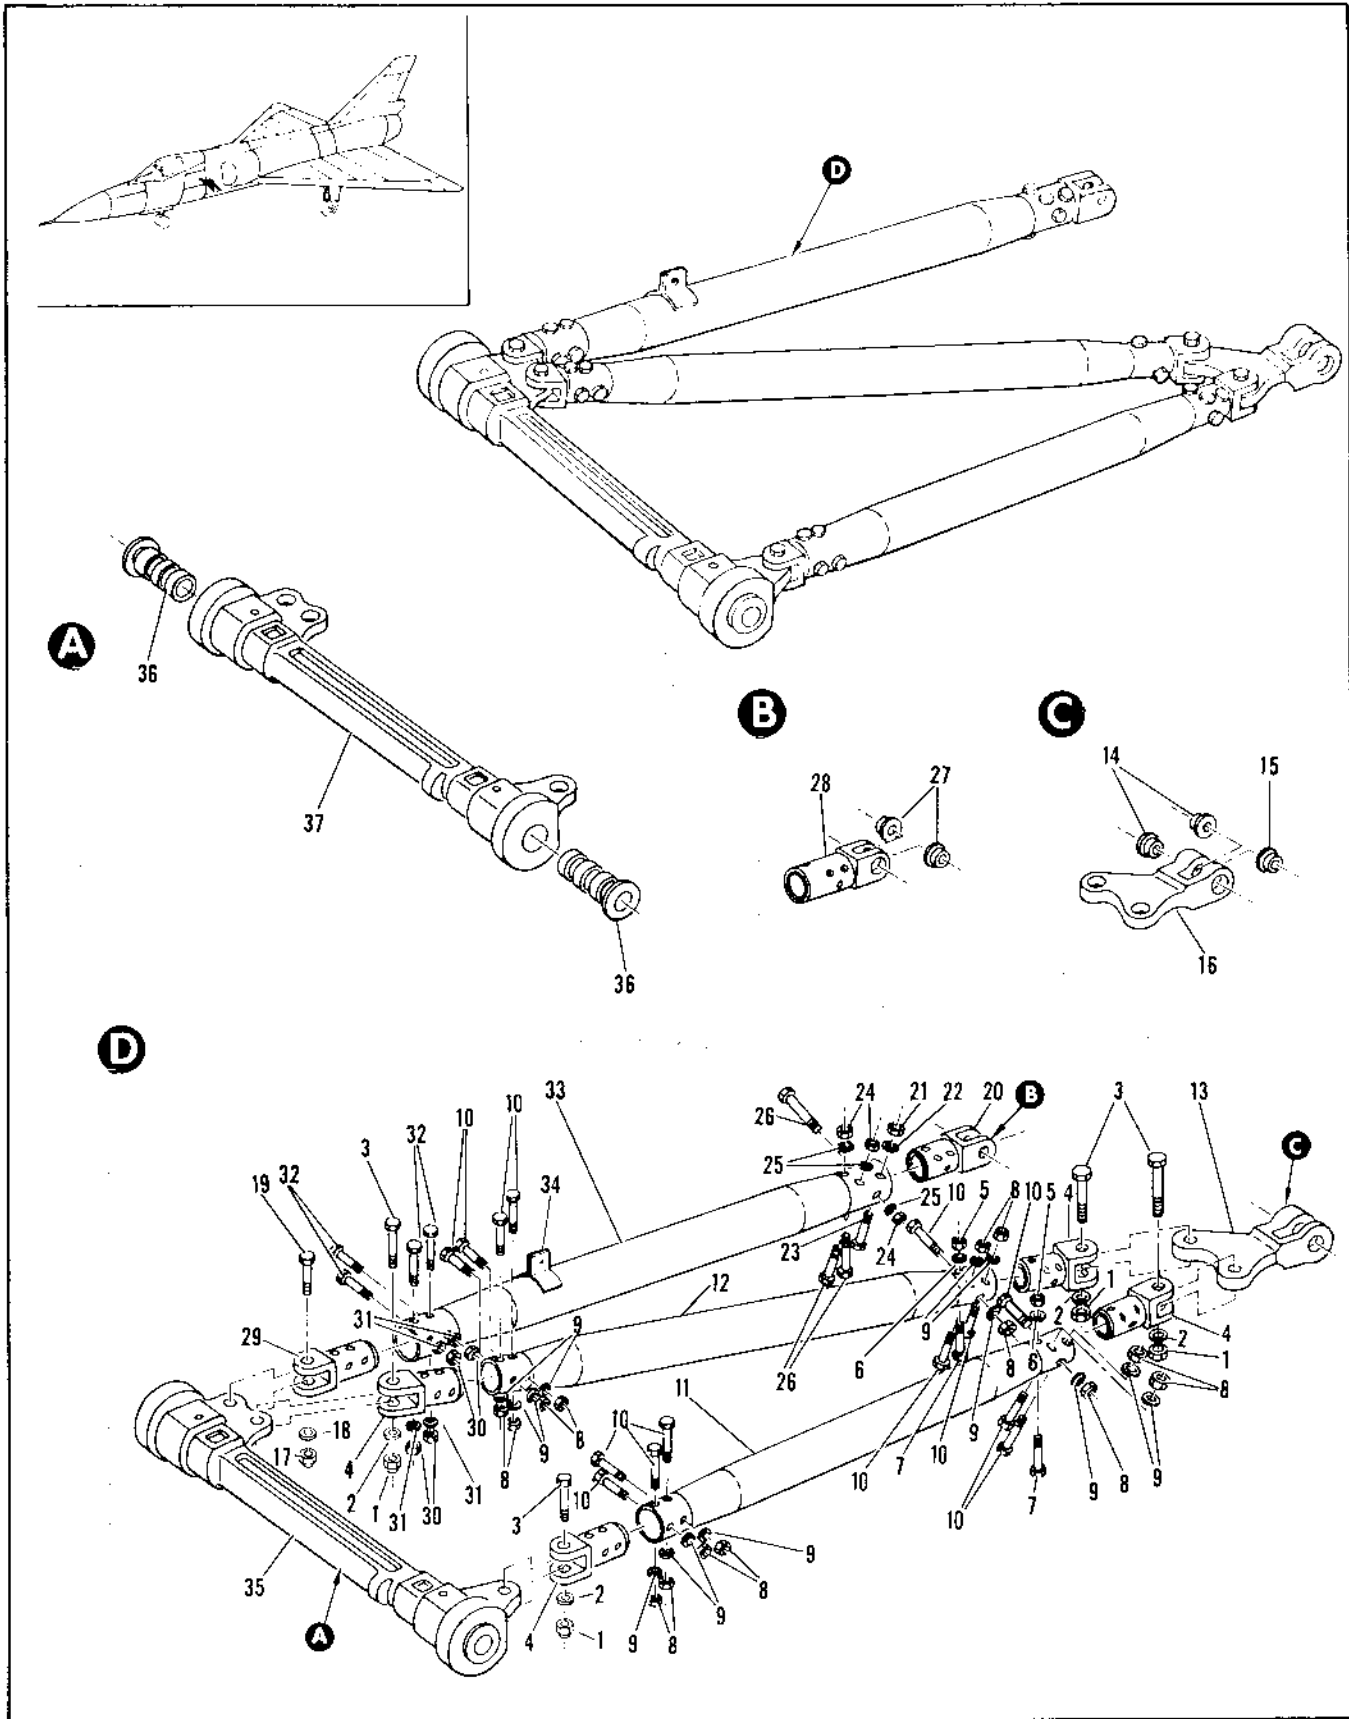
Fwd Displacement Gear Upper Drag Arm Assembly Alternate
